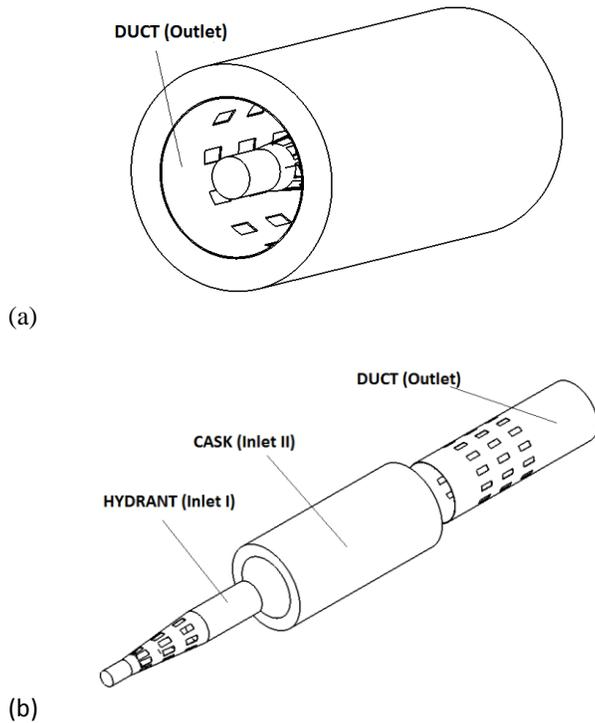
(a-b) show assembled and exploded view of the multi chamber flow splitting muffler.
